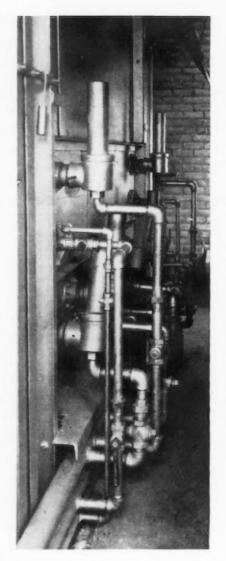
Rear view of a radiant tube enameling furnace showing the location and arrangement of burners.
